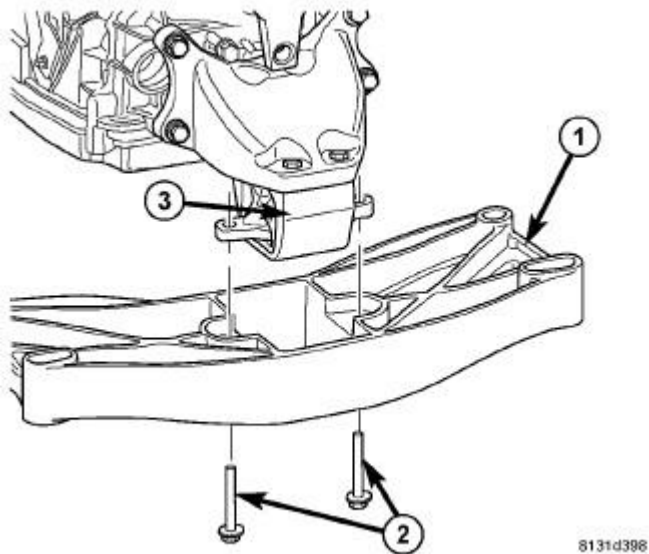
Removing/Installing Transmission Crossmember Bolts
